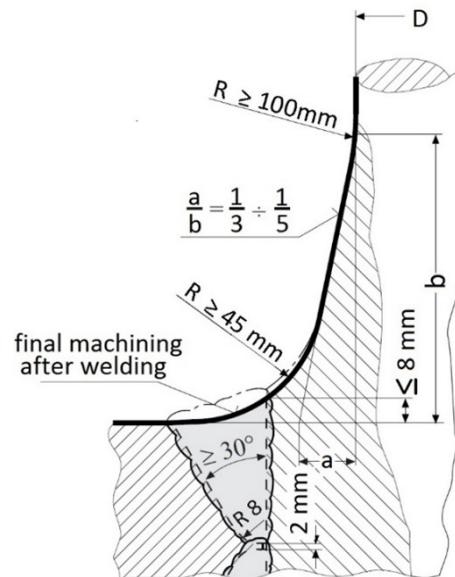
Welded joint between rudder stock and coupling flange
